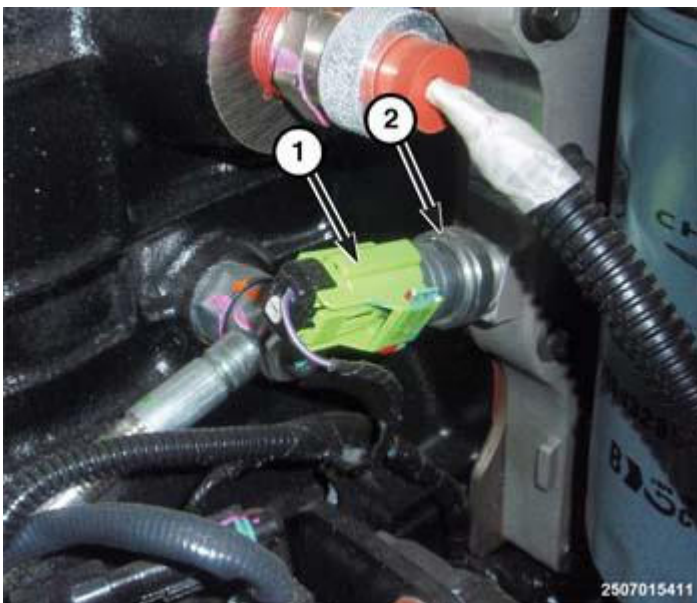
Oil Pressure Switch & Wire Harness Connector
